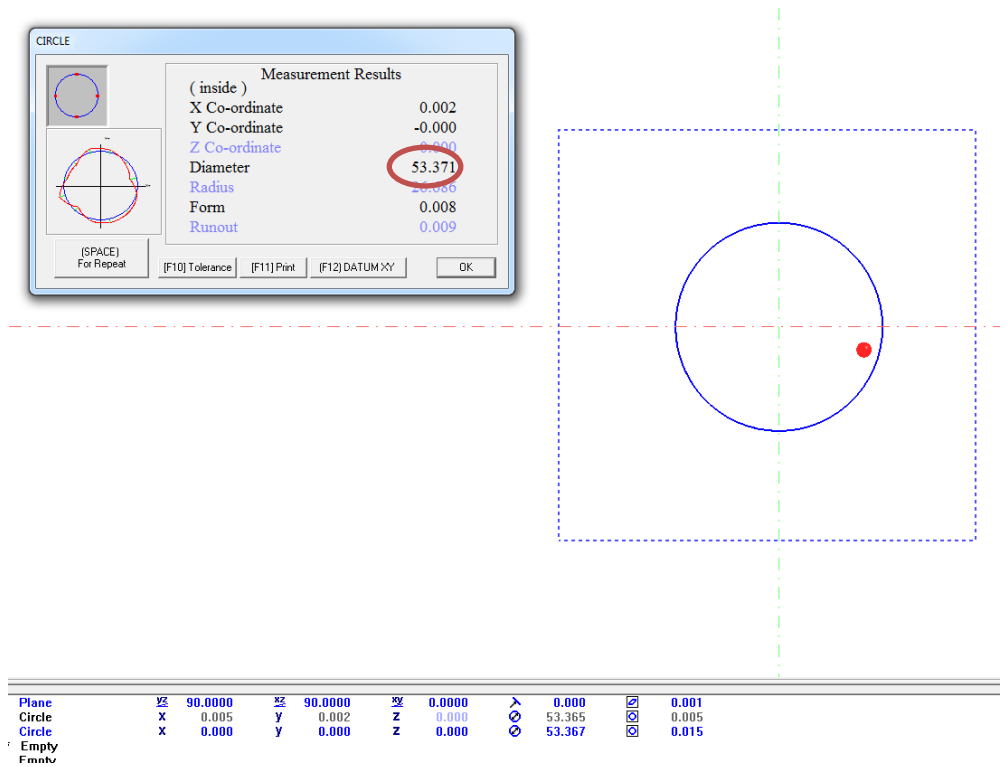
CMM Results of Bore Diameter with Welded Flanges – 10mm Deep
